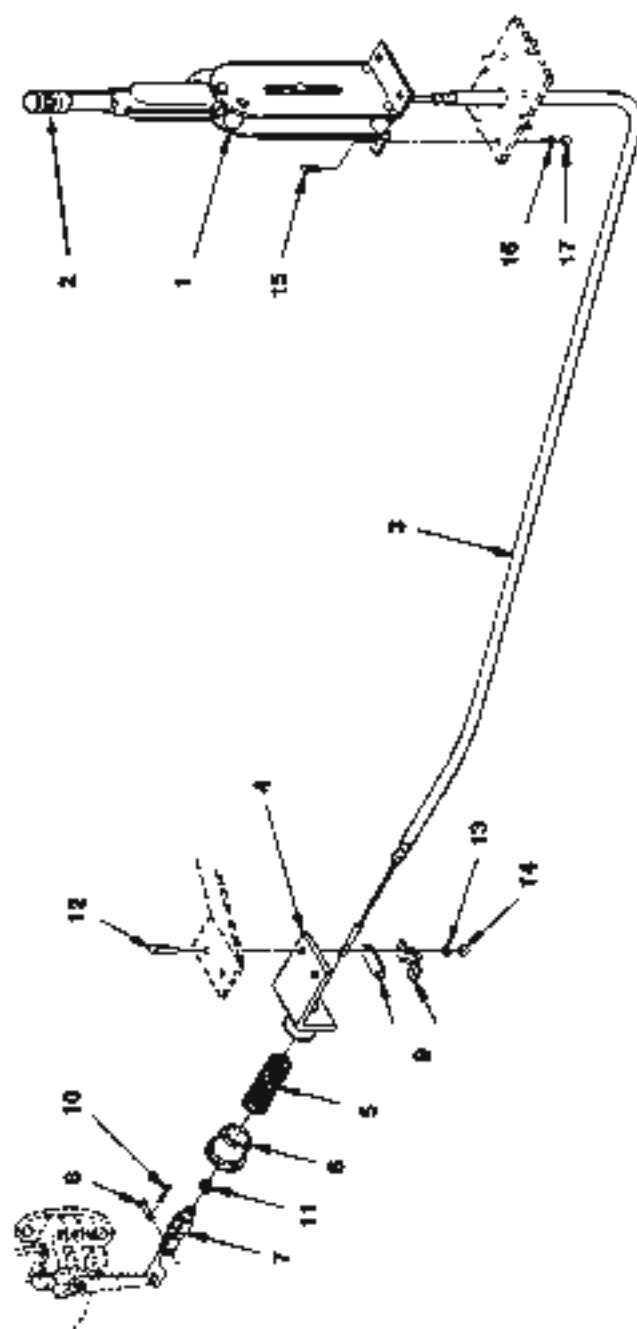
Parking Brake Caliper & Disc (622, 622/4, 824)
